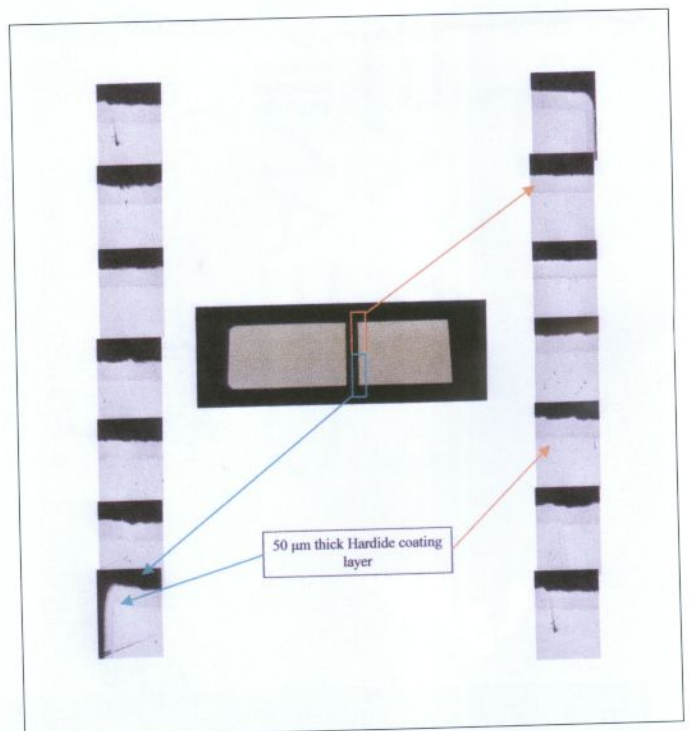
Hardide coating inside 1mm diameter hole in a 5mm thick steel plate. Long images on the sides are stitched together from a series of micro-photographs and show good uniformity of the 50 microns thick Hardide coating inside the full depth of the hole.
